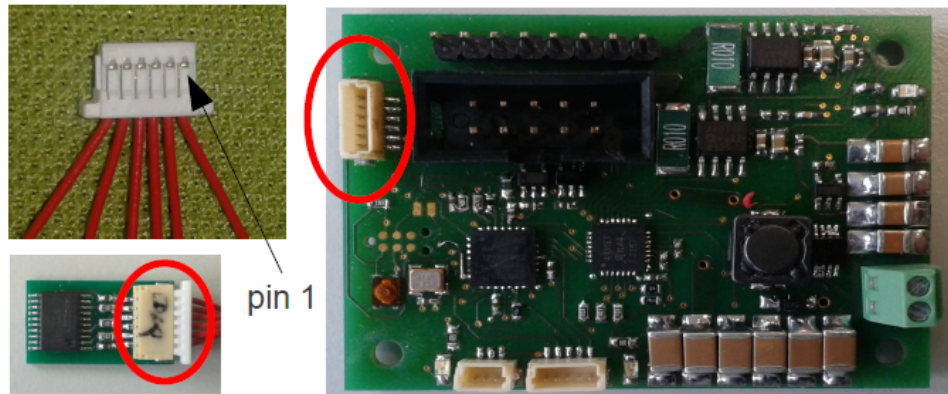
Cables and connectors to connect the spring displacement sensor with the motor driver board; red circles mark the applicable connectors on the printed circuit boards.
